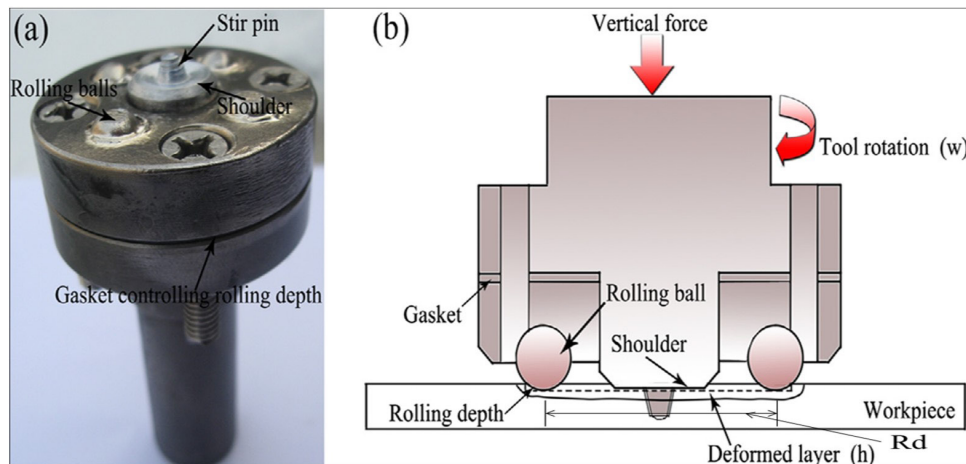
(a) IRFSW tool (b) Schematic illustrations of IRFSW tool, Rd is the rolling diameter of steel balls [187].
